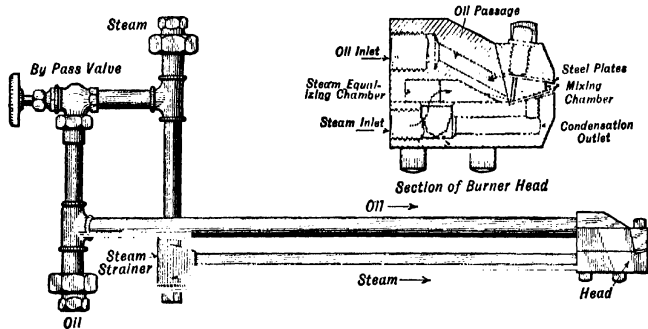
Hammel Steam Atomizing Oil Burner Complete.
